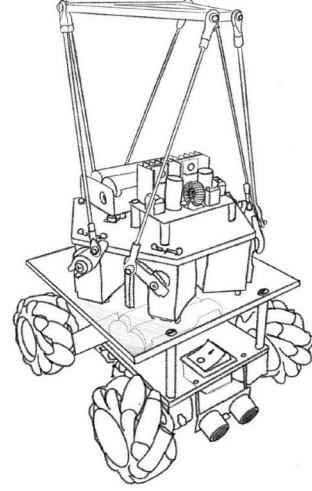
Technical drawing of the robot's internal design without the outer shell, showing the Stewart platform structure mounted on an omnidirectional wheeled base.
